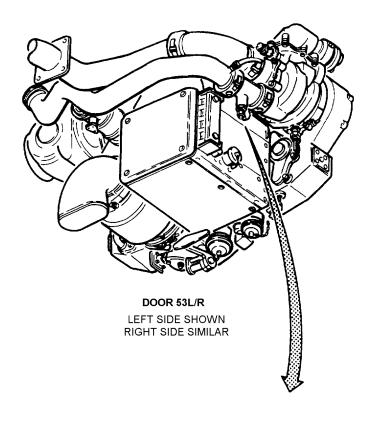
Engine Motive Flow Check Valve Leak Test (Sheet 2)
